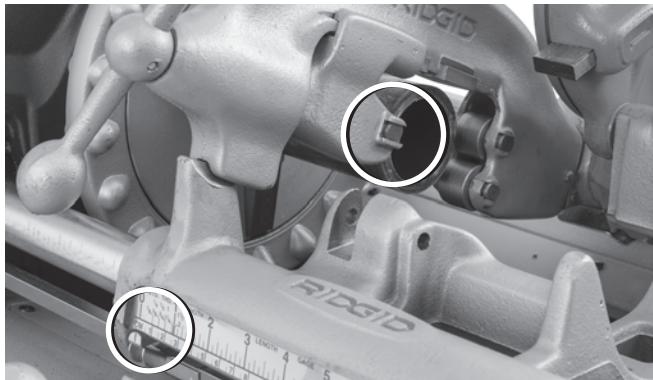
A – Cutter Wheel Blade Against End of Pipe. Set Pointer to Zero (0)
